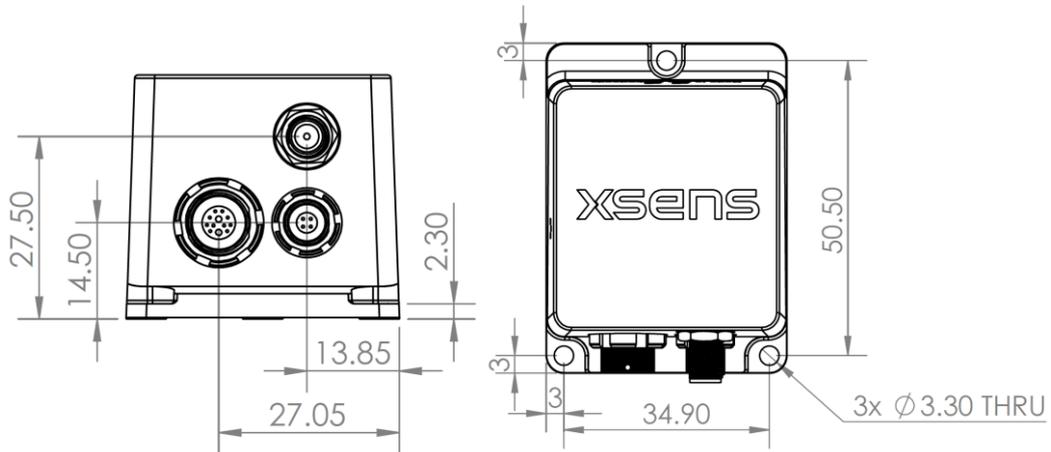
MTi-680G connector and mounting hole positions (dimensions in mm)
